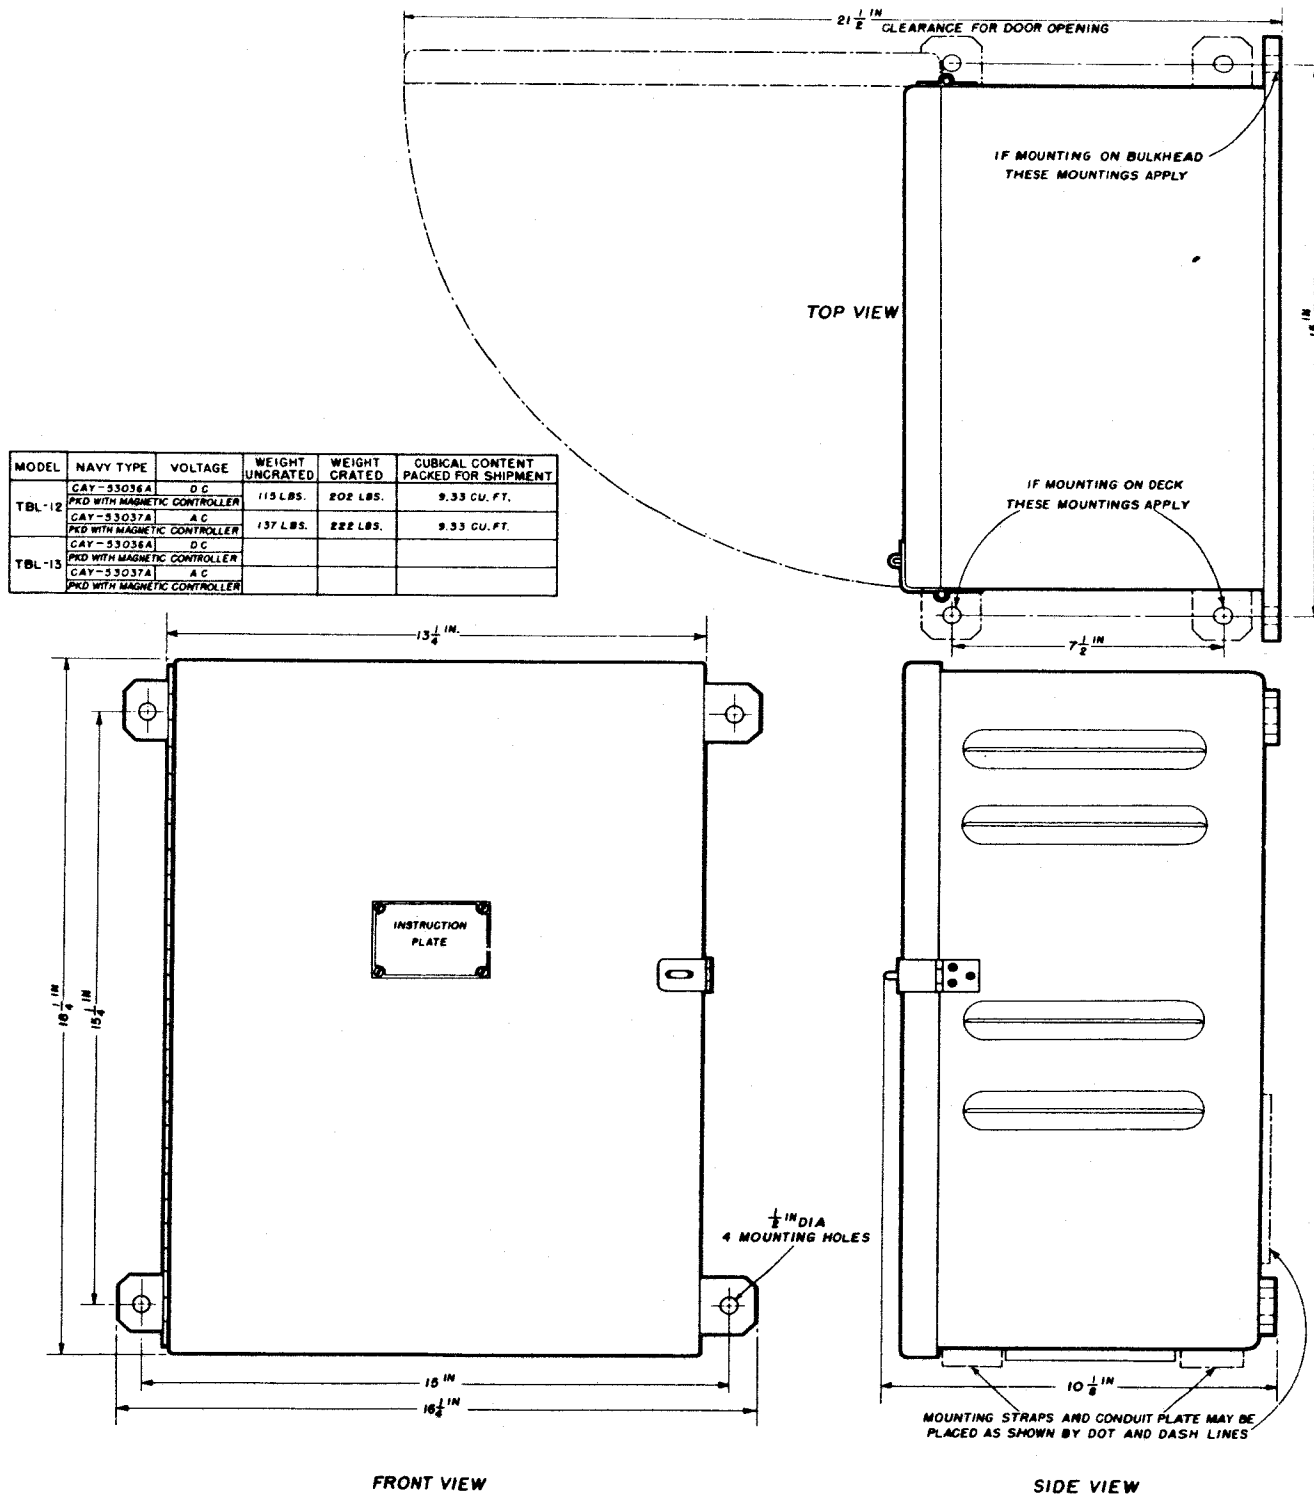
Filter Unit, TBL-Series Type CAY-53036A and CAY-53037A. Outline Drawing (Dwg. 7613257)
